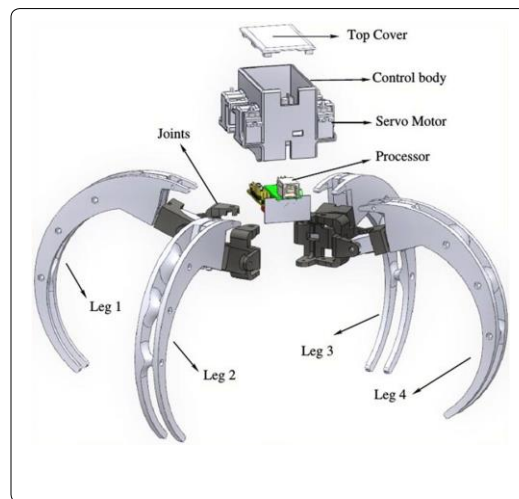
Exploded view of the Scorpio. An exploded view of the Scorpio model displaying all the components of the Scorpio
